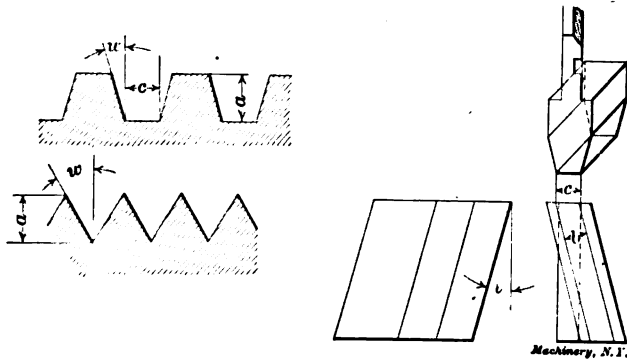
Diagram Illustrating the Planing of Thread Tools.
